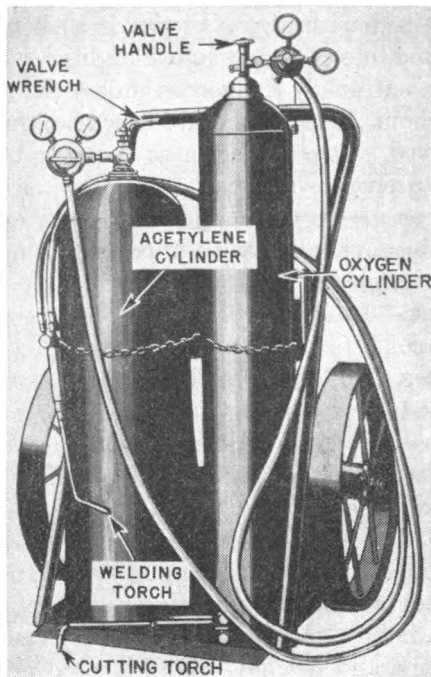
Portable oxyacetylene welding outfit.
